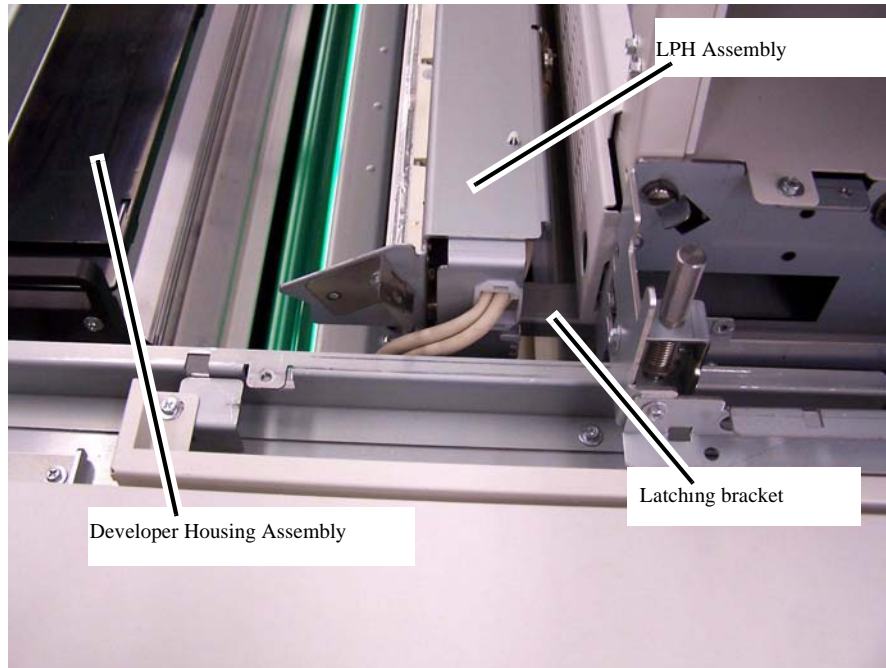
LPH Assembly in latched position (viewed from right side of IOT)
